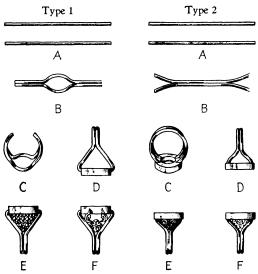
Steps in making rings from wire. A, 16-gauge round sterling wires. B, wires bent to fit bezel and soldered together. C and D, wires shaped and soldered to bezel. E and F, decoration applied to ring assembly.
